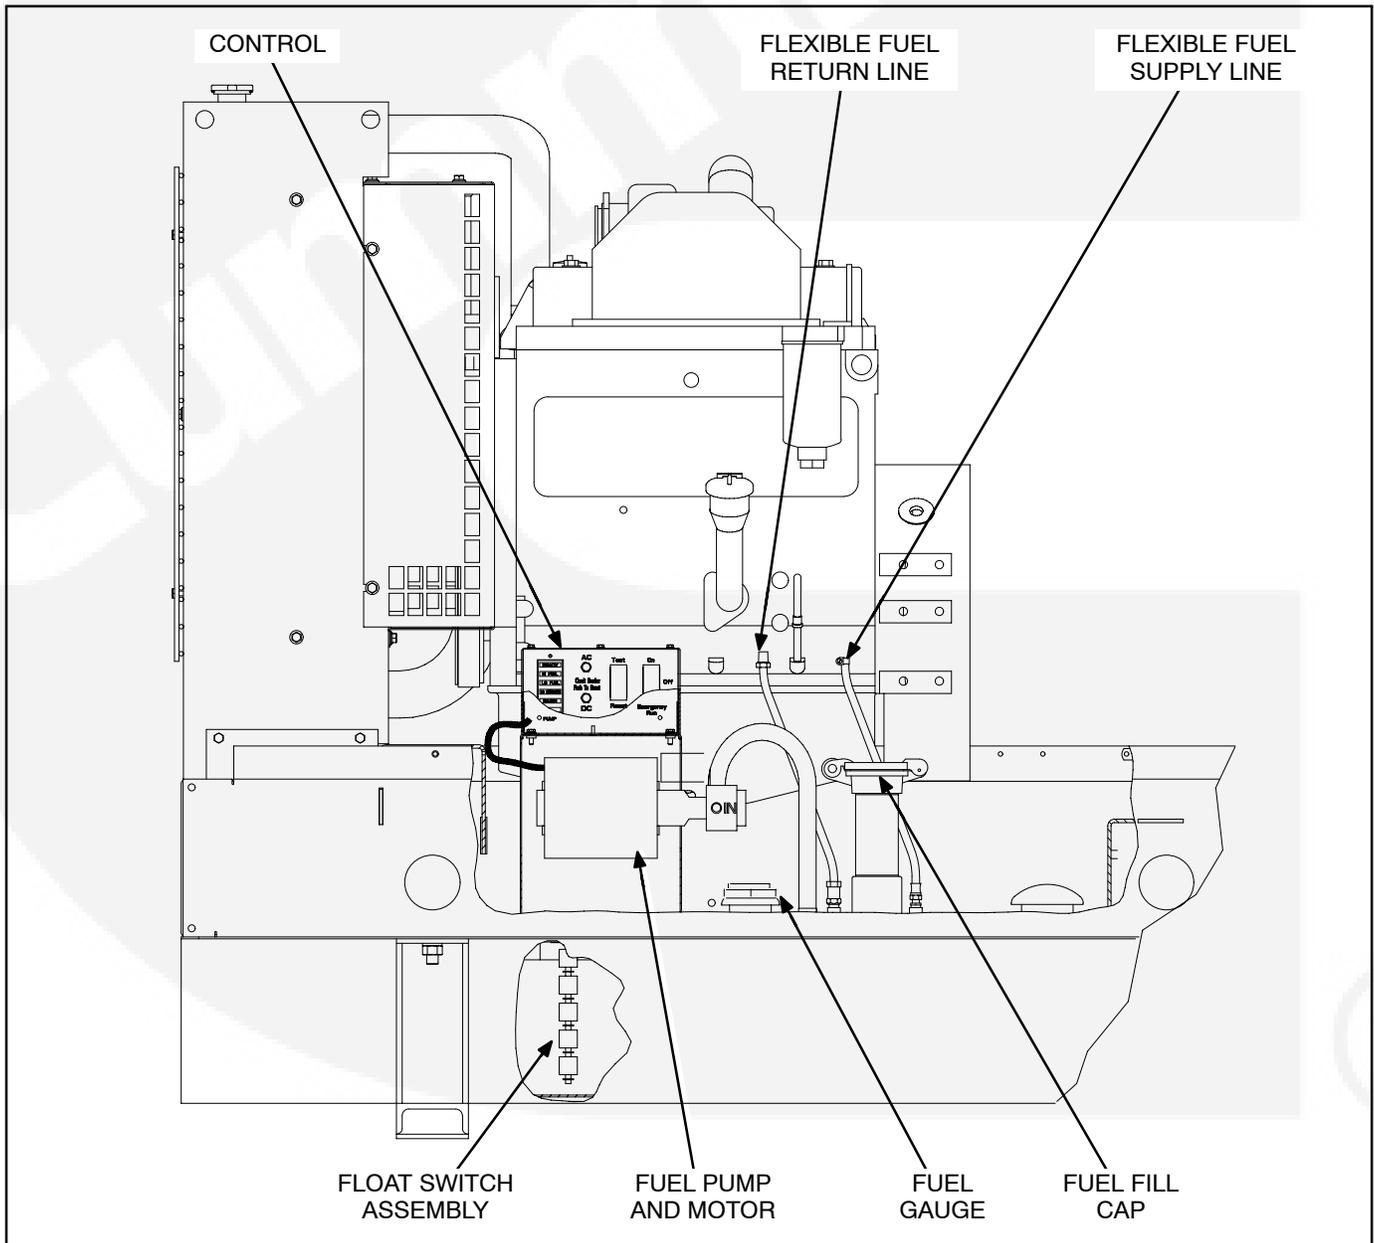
TYPICAL SUB-BASE INSTALLATION
